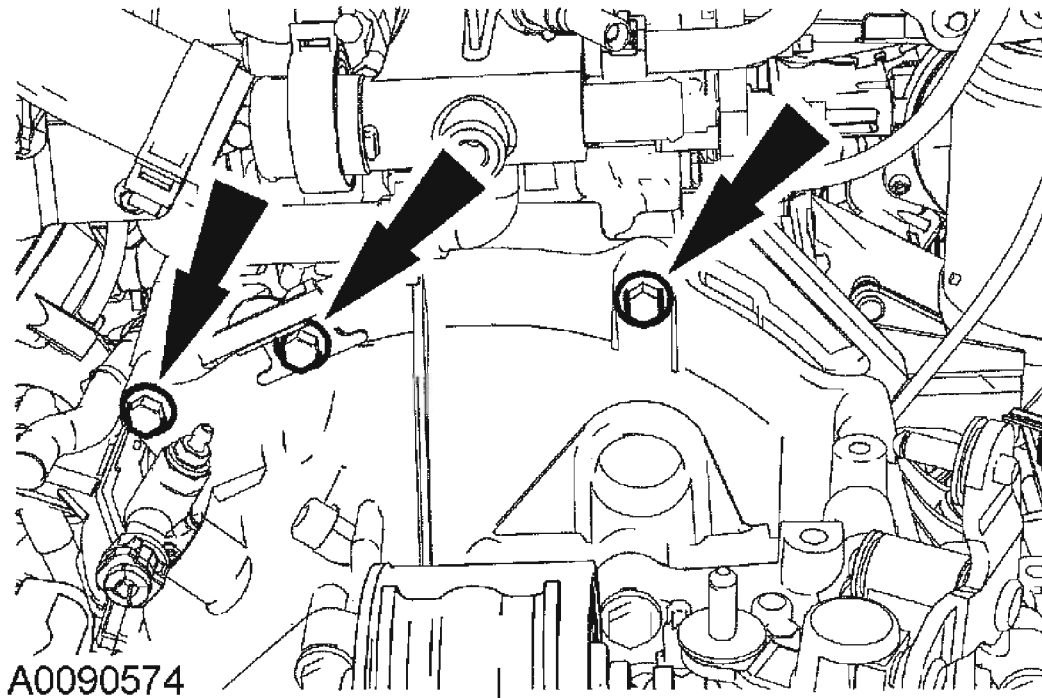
Removing LH Transaxle Support Insulator Bracket
